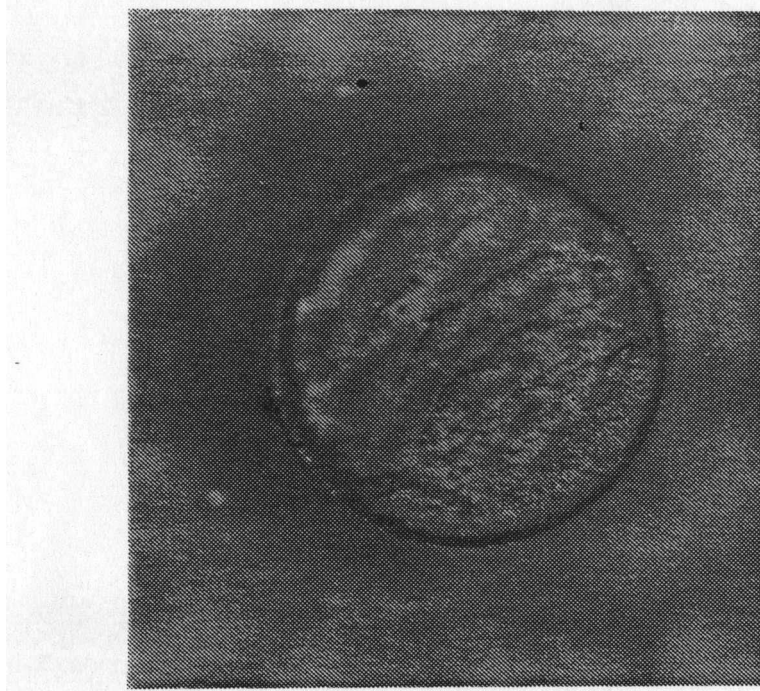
Fracture Surface of Sample No. 5. 36X.
